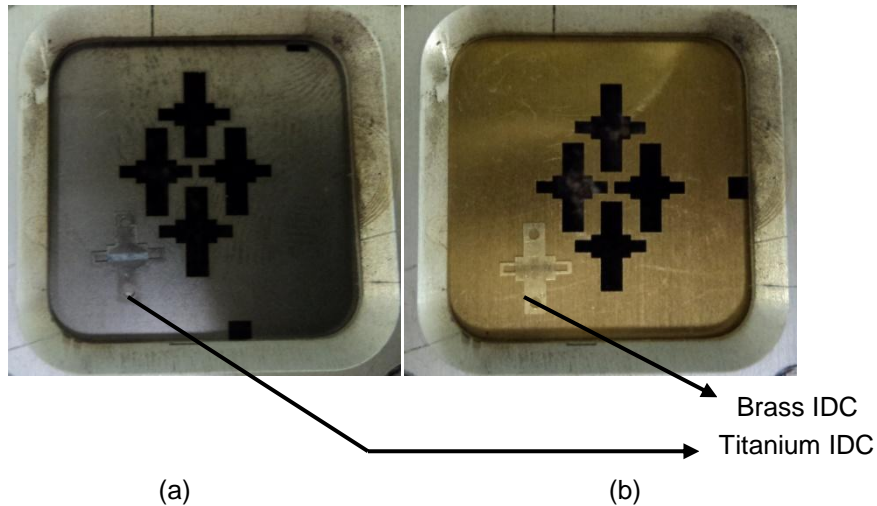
Jig 1 position showing (a) Titanium IDC cut out (b) Brass IDC cut out.
